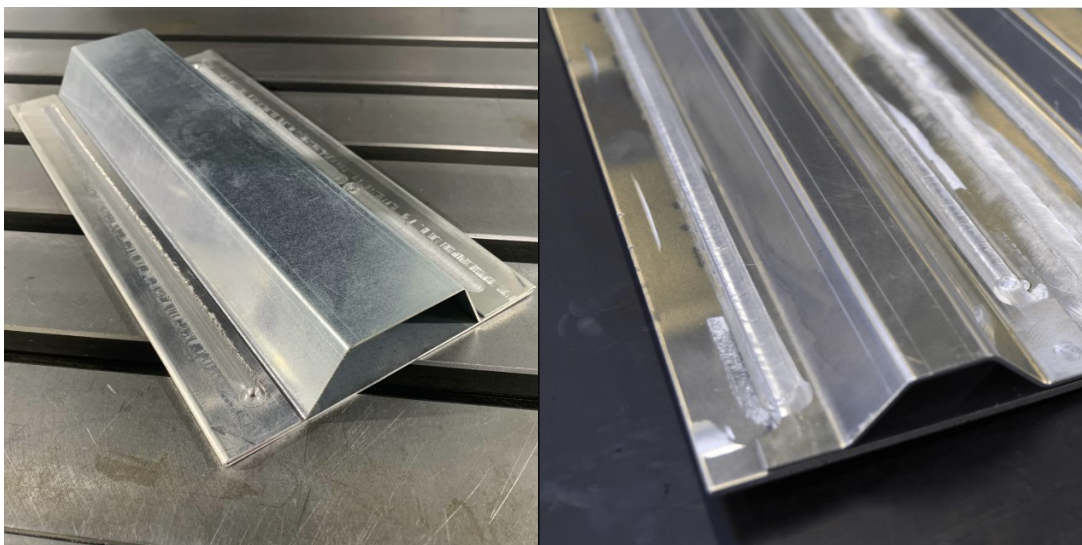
Stiffened panels obtained with Friction Stir Lap Welding [19]
